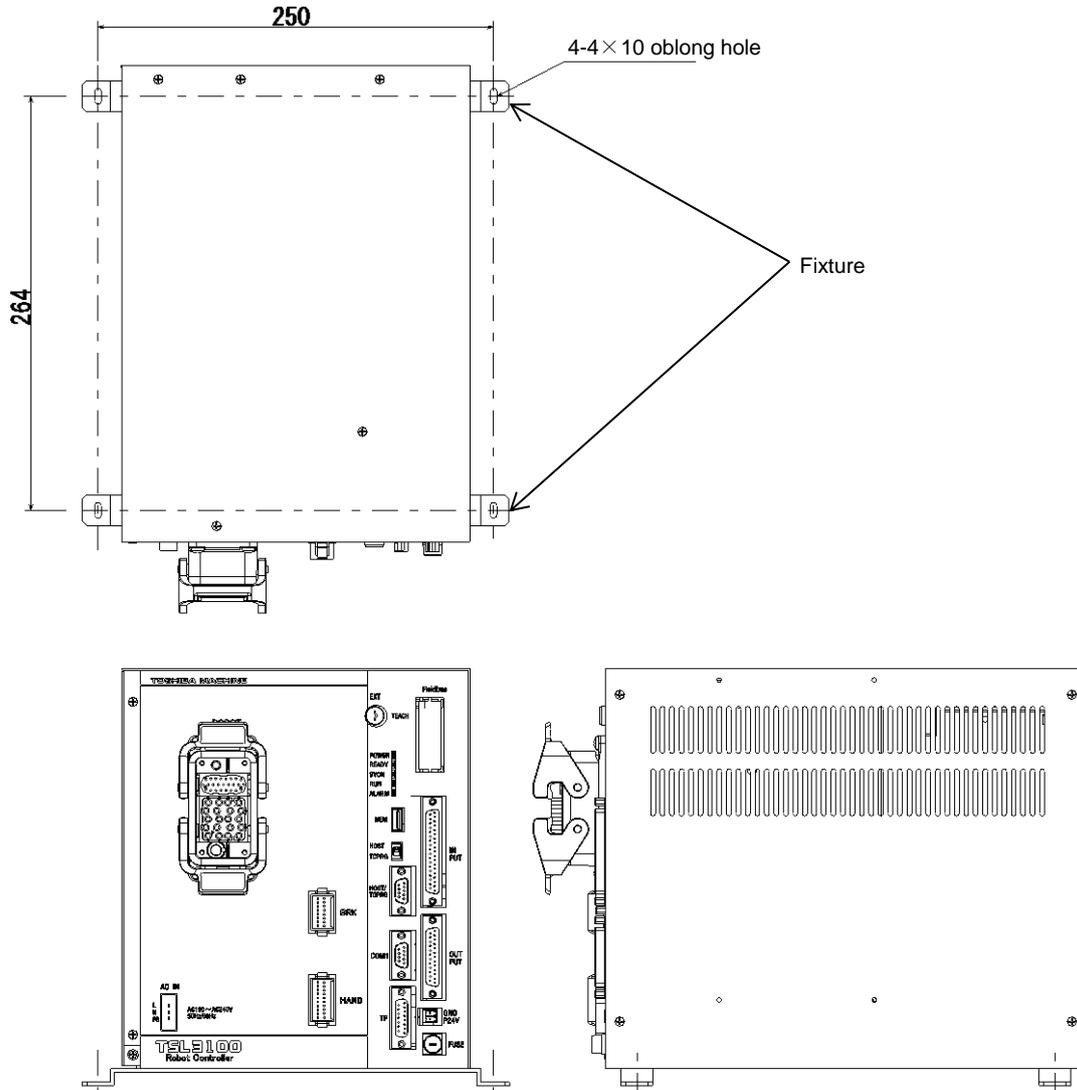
Screw hole dimensions for securing controller (TSL3100)
